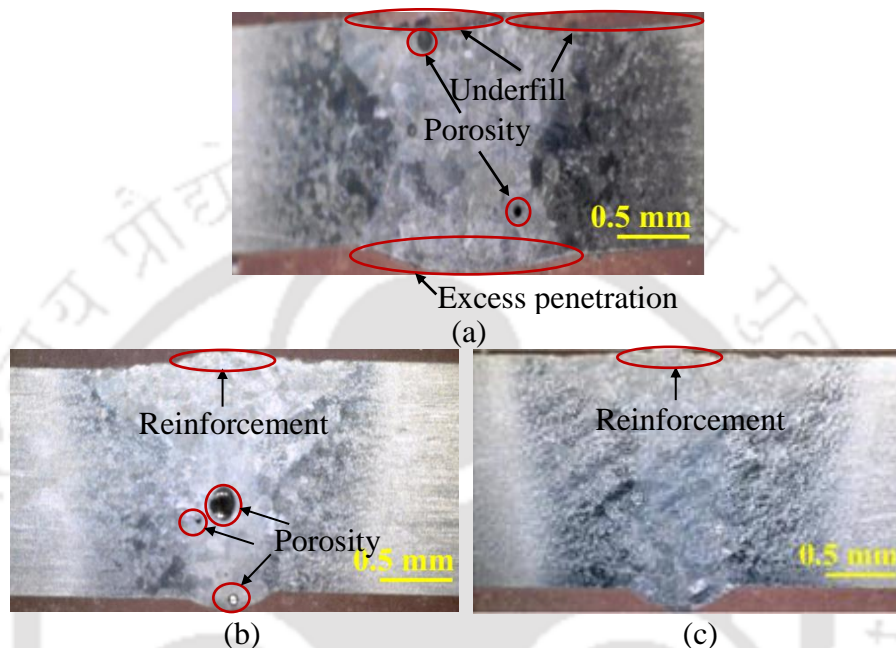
(a) Underfill and excess penetration weld defects at higher line energy (80 J/mm) in Exp. 4; Reinforcement welding defects in weld bead at lower line energy for (b) Exp. 5 (60.01 J/mm) and (c) Exp. 8 (67.52 J/mm)
